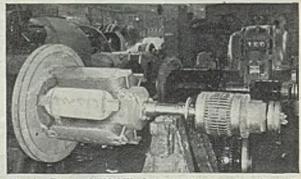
Rotor of 500 kW alternator for transportable unit
